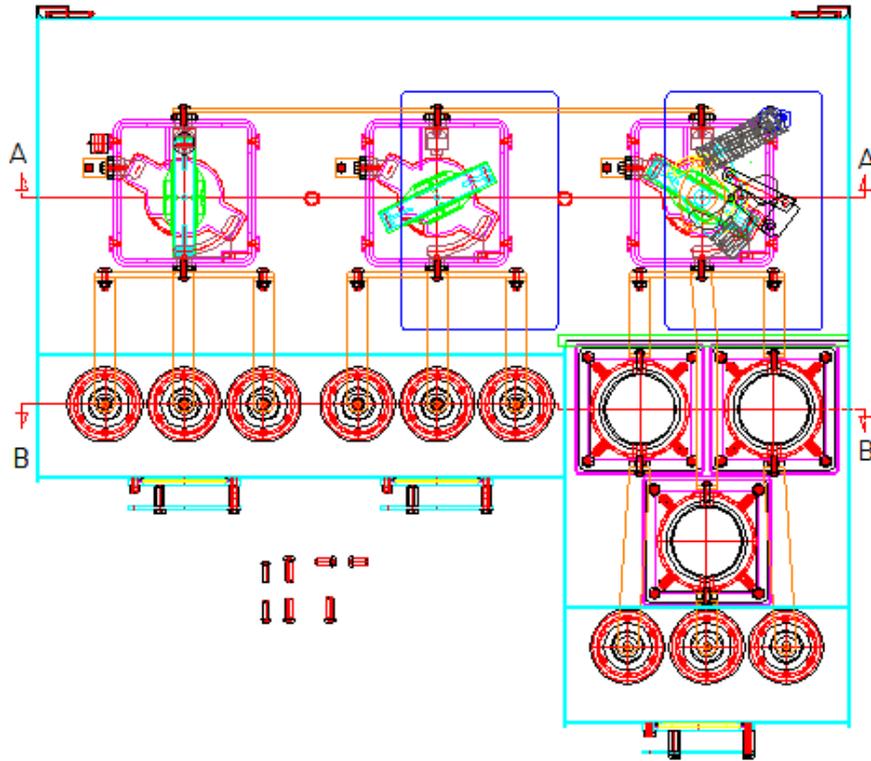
The Section view of the vessel as the load breaker and fuse holder installation are completed
